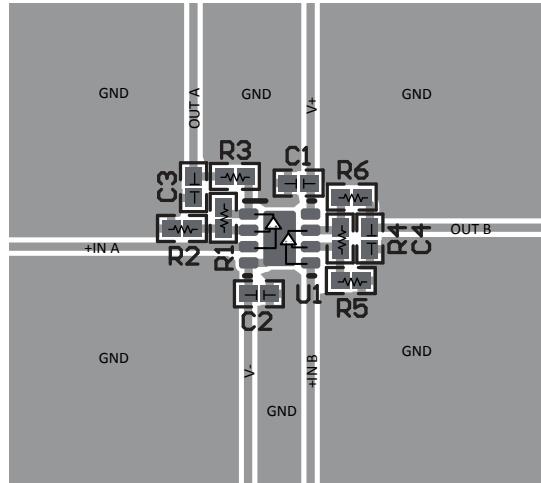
Example Layout for WSON-8 (DSG) Package
